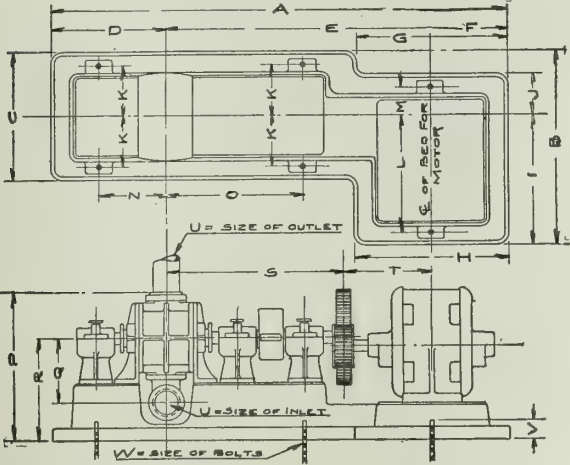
DIMENSIONS, GEAR DRIVEN VACUUM PUMPS
